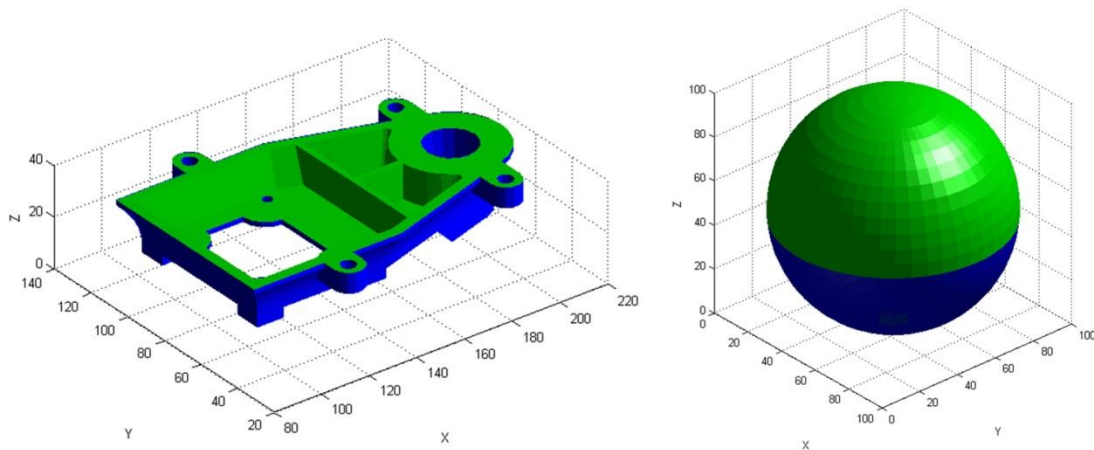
Allocation of non-demoldable facets to side core facets, Example II.
